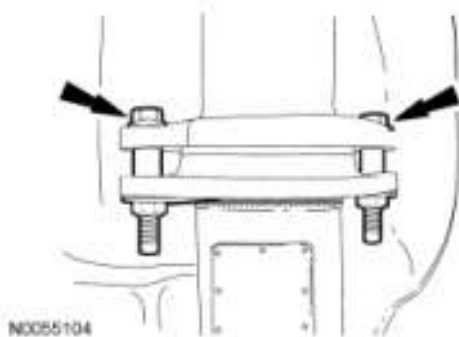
Locating RH And LH Exhaust Flange Nuts
